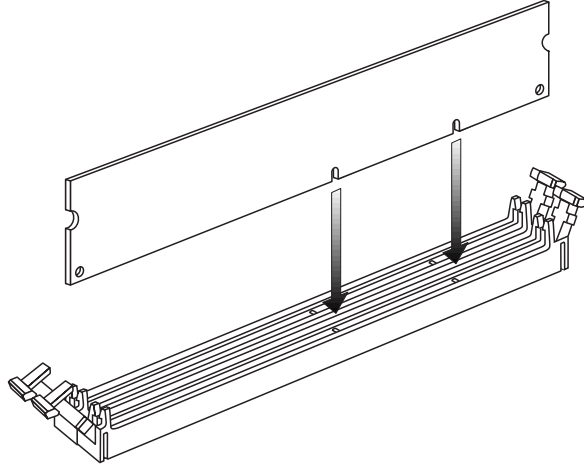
Insert DIMM module into connector with proper notch alignment
